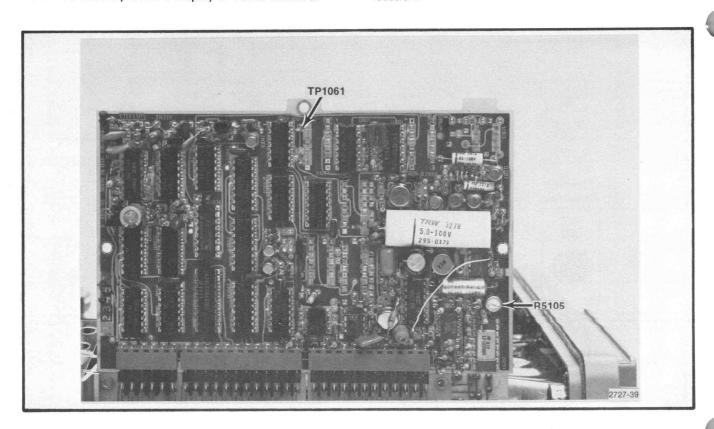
Location of timing adjustment R5105 and TP1061 on sweep board.
